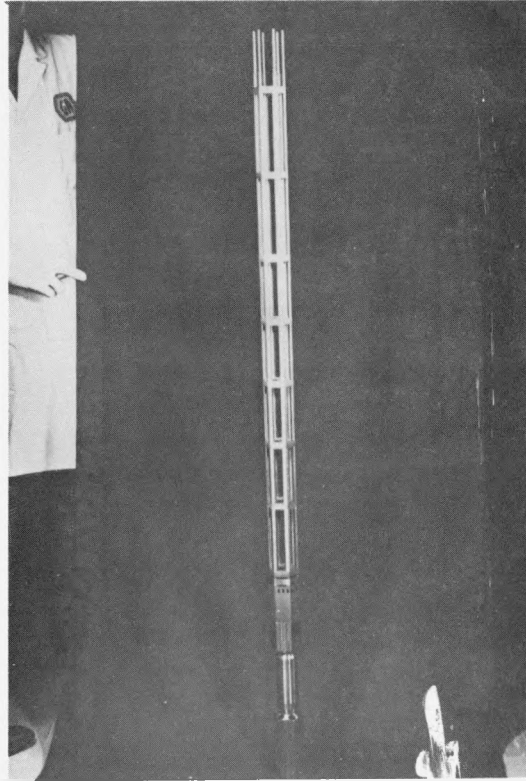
F-5 grid-spaced bundle skeleton after assembly
